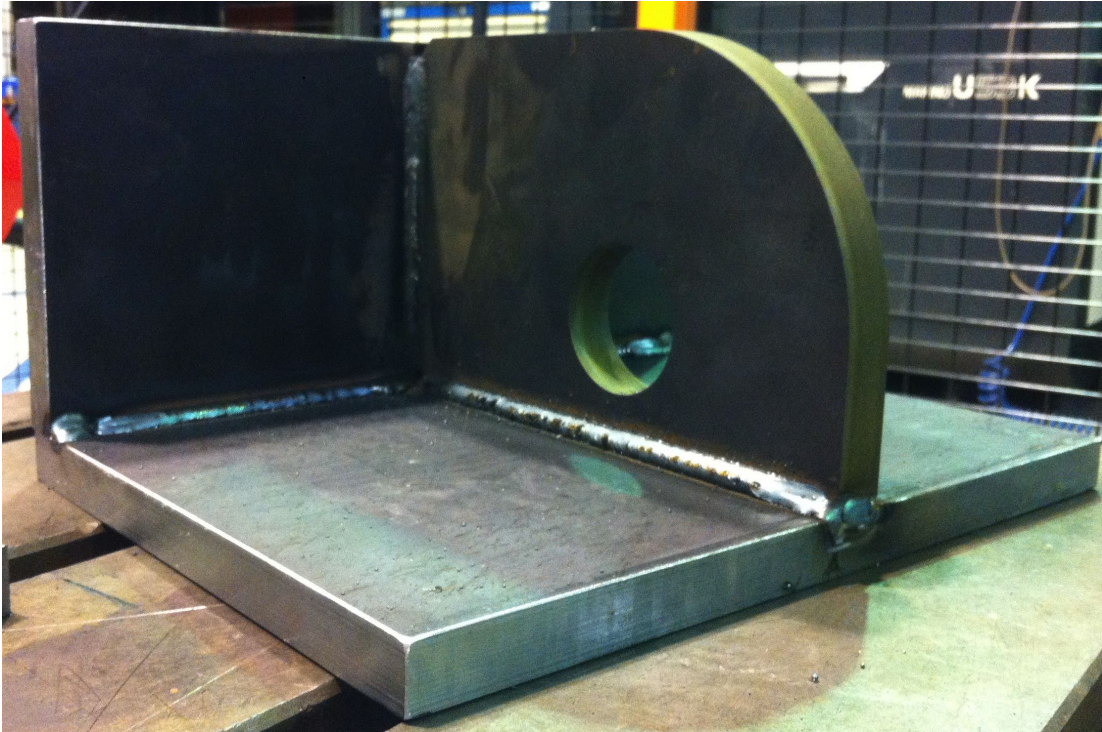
Thruster tunnel section after welding. The welding parameters applied (Current, waving parameters) are not optimal, but the precision of the welding paths is acceptable.
